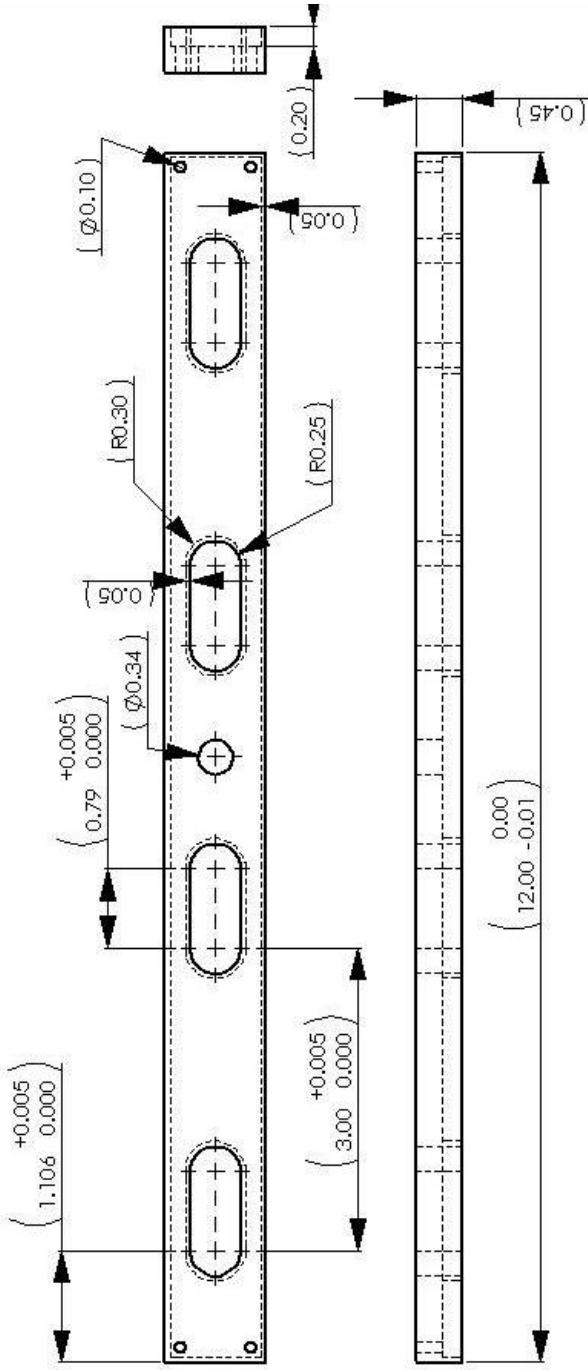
Engineering drawing for blockage configuration 3 (Third angle projection)
